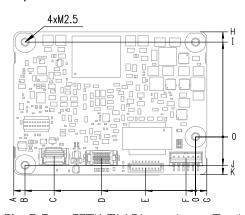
FETK-T1.1 Dimensions - Top View
